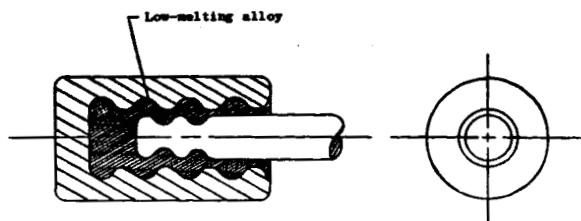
Alinement mechanism using boltless method (ref. 45).
